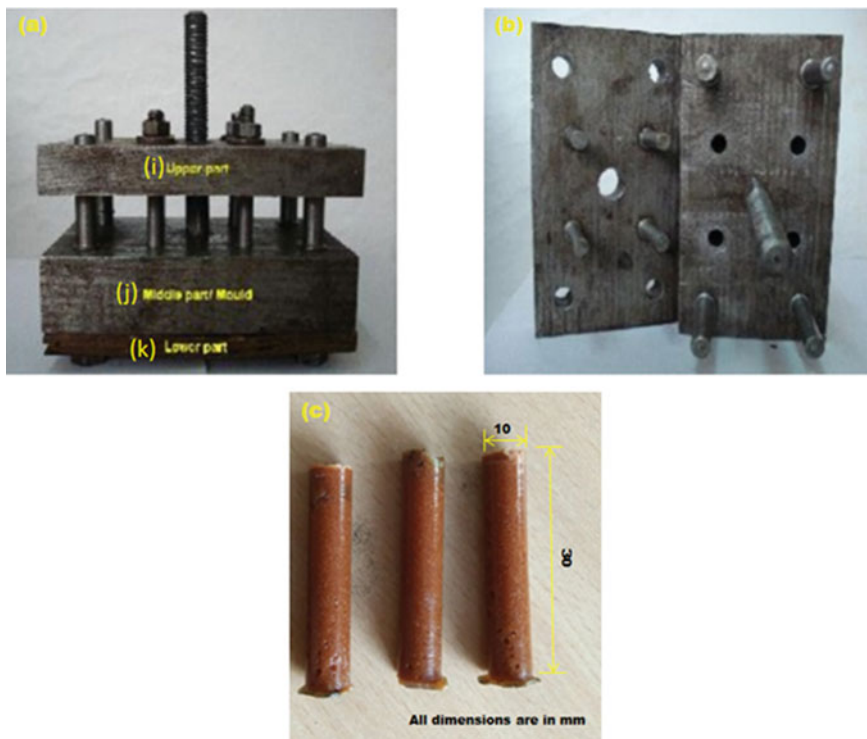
a Steel mold for composite preparation (i) upper part of the mold (j) middle part of the mold (k) lower part of the mold b two halves of the mold c composite pin samples
